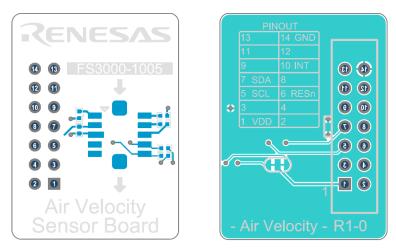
Sensor Board FS3000 Layout with PIN Configuration
